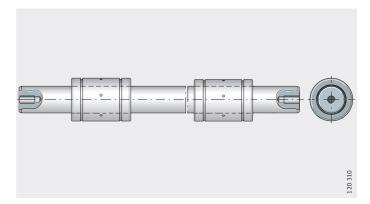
Shaft with axial threaded holes, two linear ball bearings
